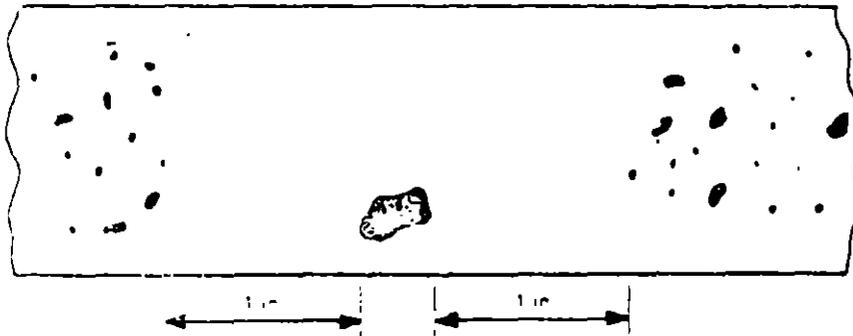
CHARTS FOR t OVER $\frac{3}{8}$ in. to 2 in., INCLUSIVE
